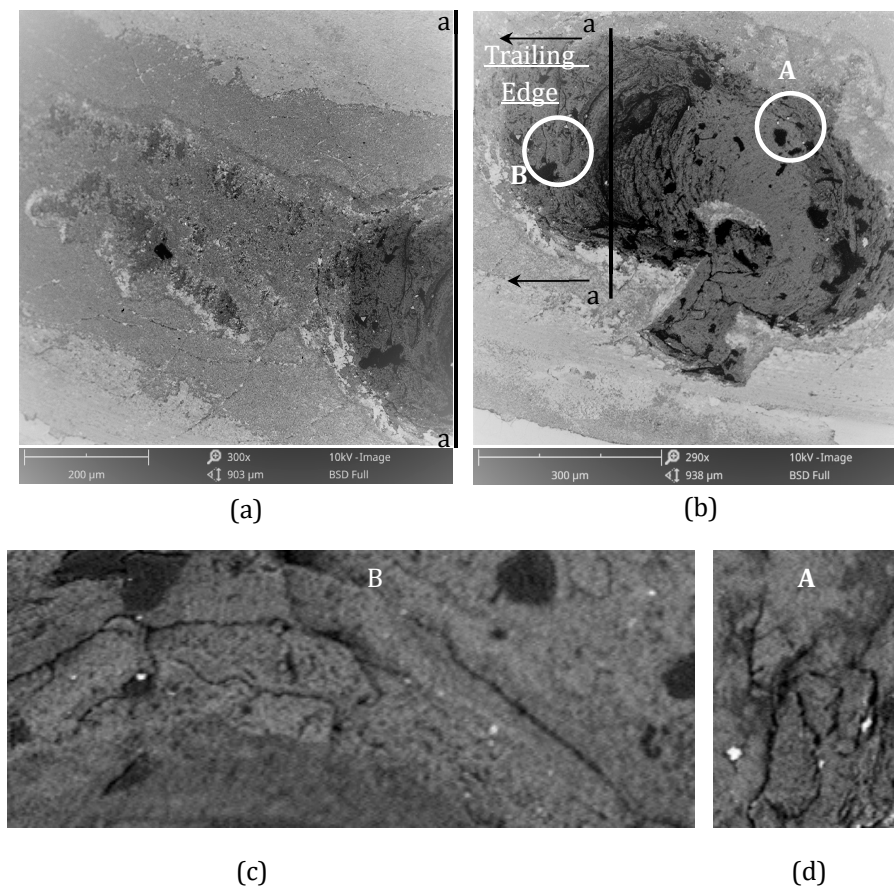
In samples F with $R_z = 3.720$ m, (a) severe micropitting and macropitting on the trailing edge of the spall, (b) spalling in Si_3N_4 upper ball Sample F, (c) long cracks in the spall at the trailing edge, and (d) cracks in the spall on the side.
